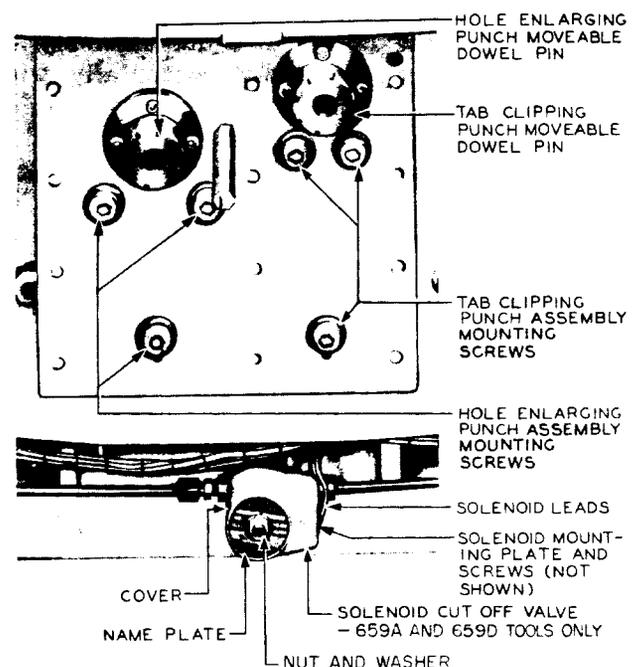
Punch and Die Assembly Mounting Details (underside of table)
